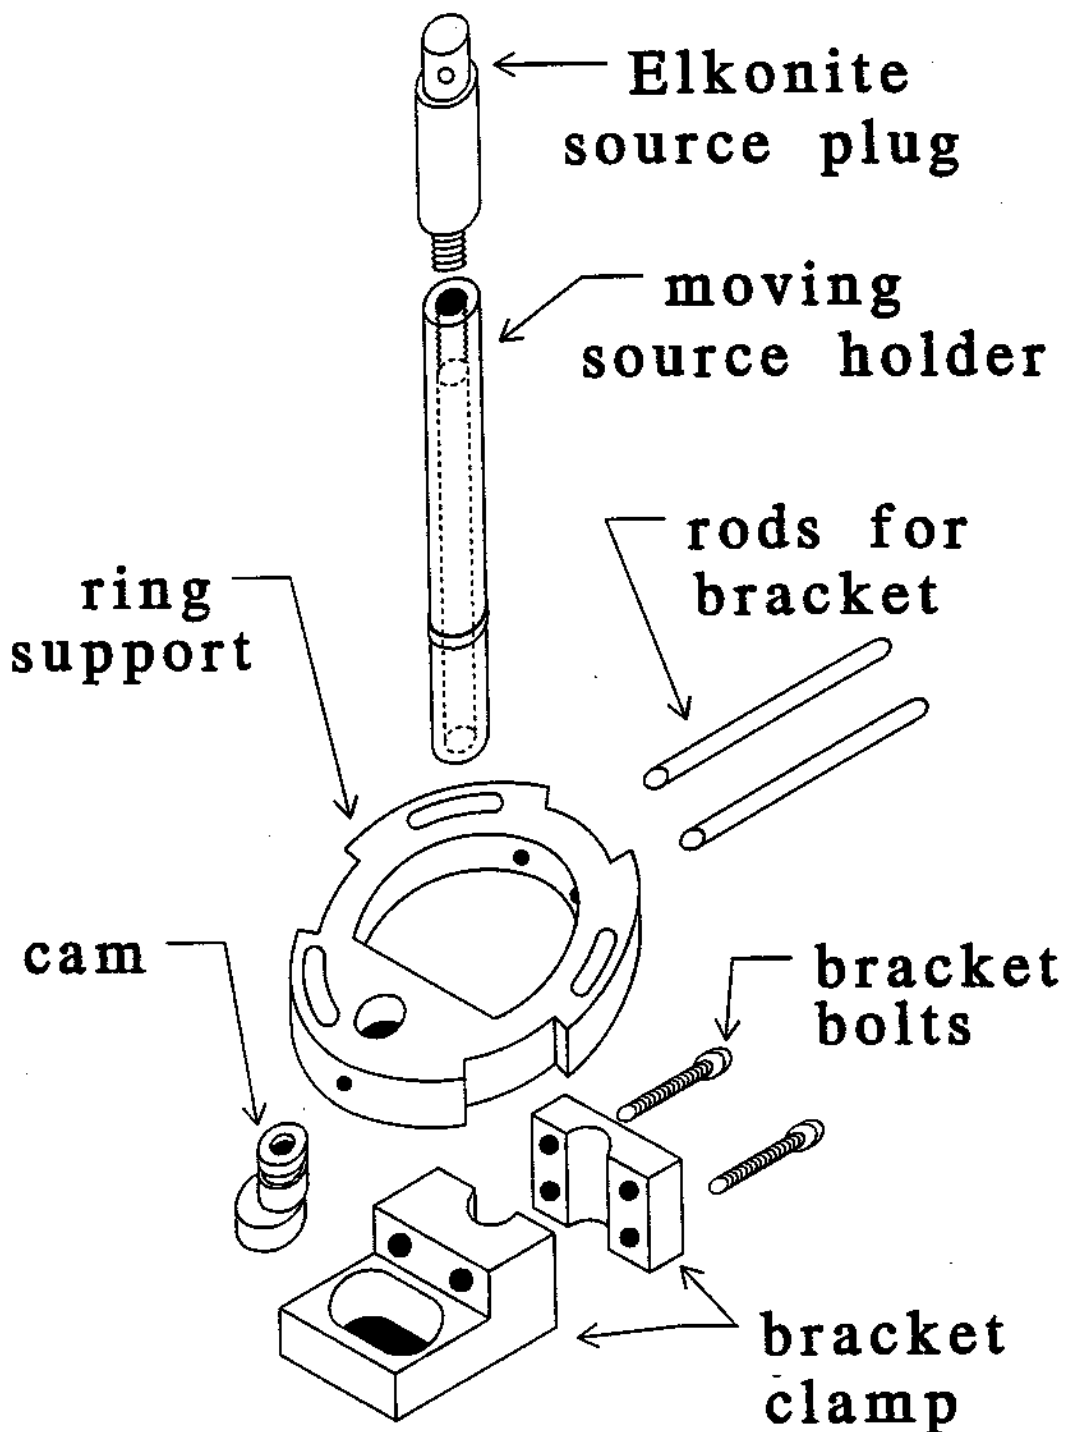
Three-dimensional view of the components of the cam-and-shaft device used to hold and position the radioactive source. The cam is held in the ring support by a set screw. As the cam rotates, the bracket clamp and source holder slide along the rods.
